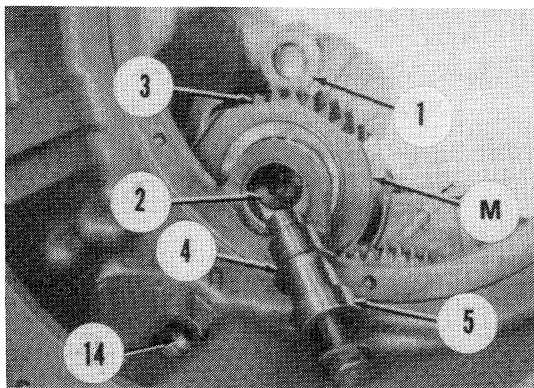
View of upper pto idler gear with Quad-Range planetary removed. Upper idler shaft (5) is removed during planetary removal procedure.
